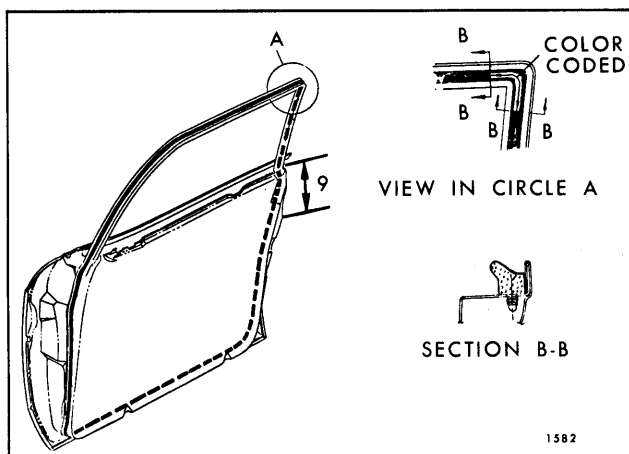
Front Door Weatherstrip - "B" Closed Styles
